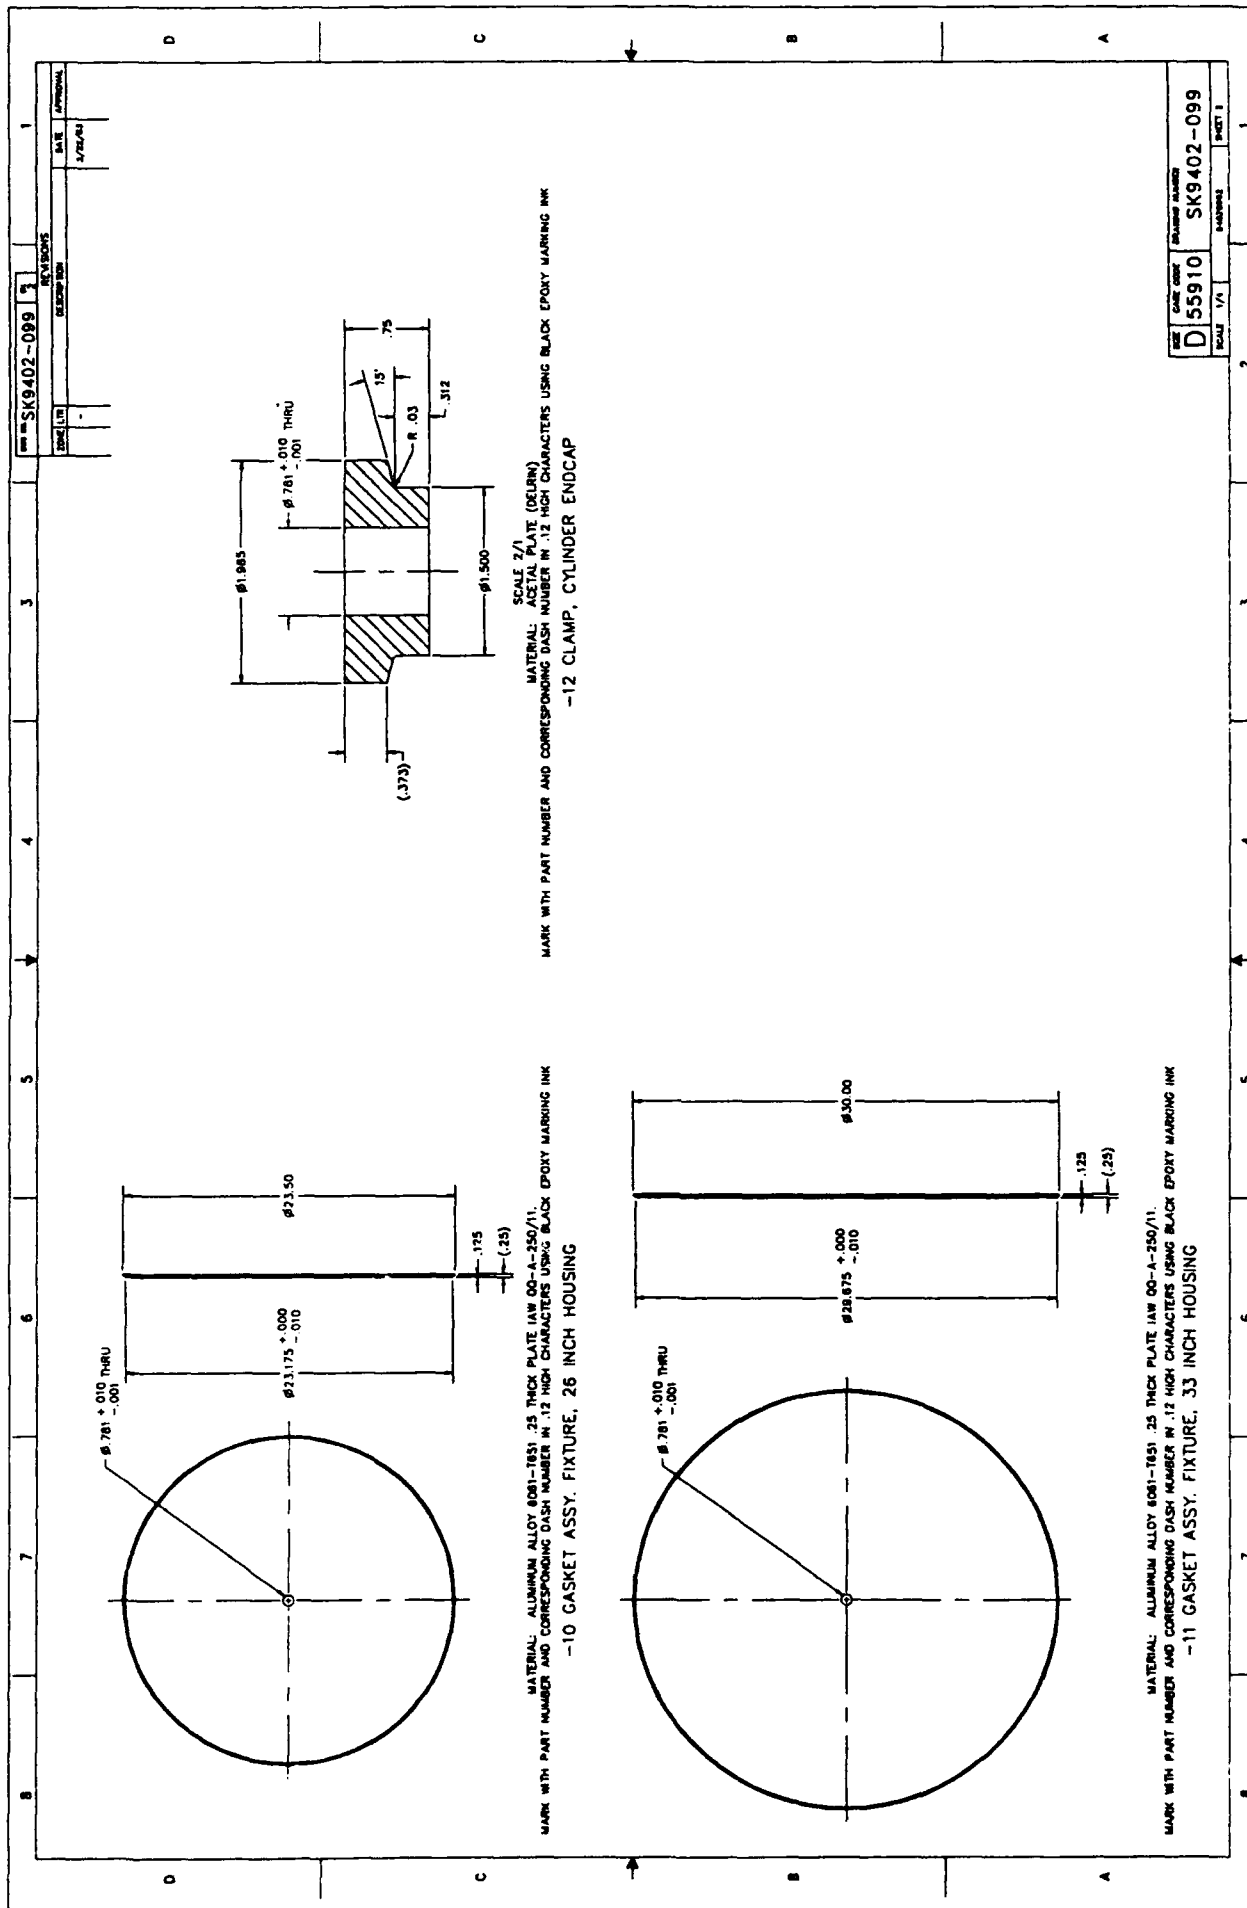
26-inch-housing cylindrical hull assembly fixtures, sheet 2.
